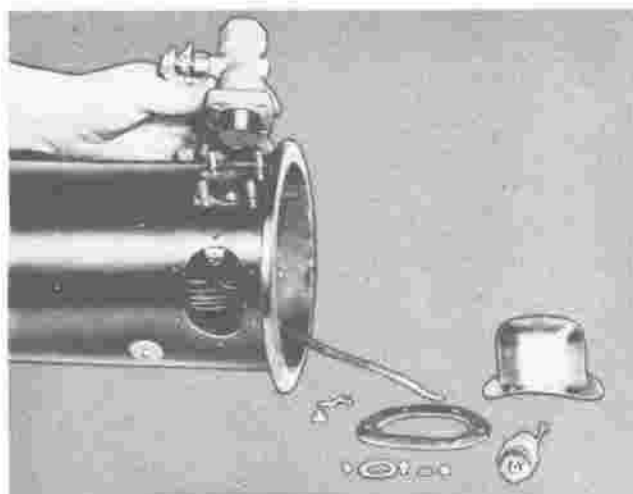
(Sheet 1 of 6)—Heater Assembly
